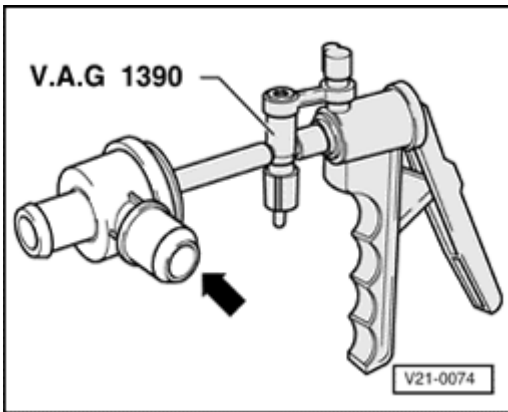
Connecting Vacuum Pump V.A.G 1390 To Charge Air Pressure Bypass Valve
